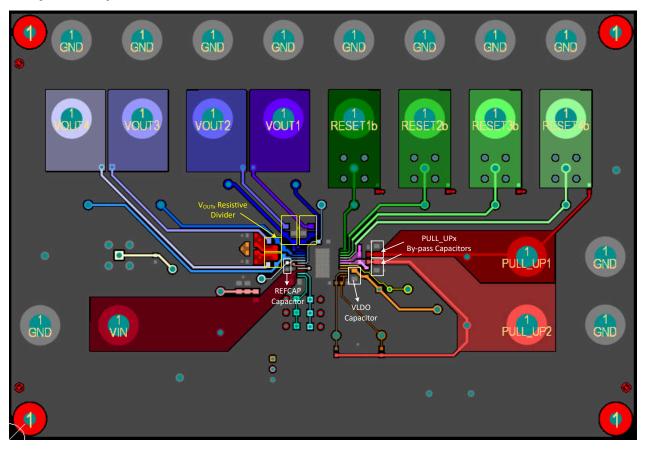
Printed Circuit Board Layout Example: Top Layer
